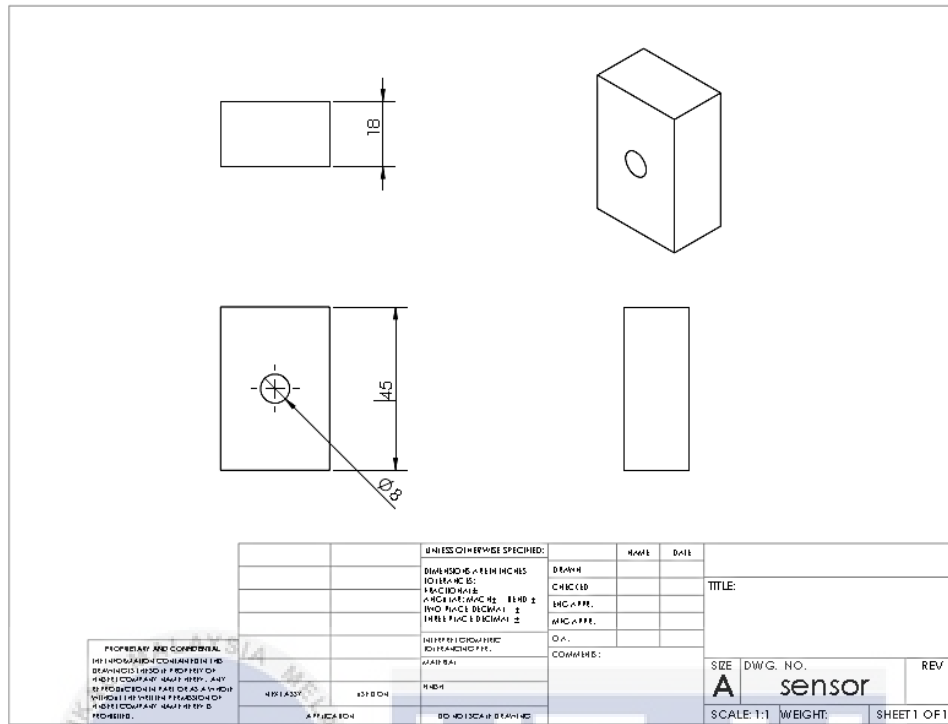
Plan CAD drawing for dust sensor of air duct robot
